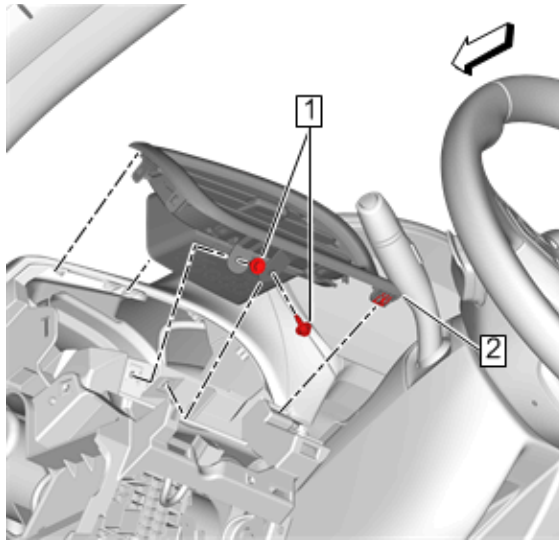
Instrument Panel Outer Air Outlet - Left Side And Bolts
